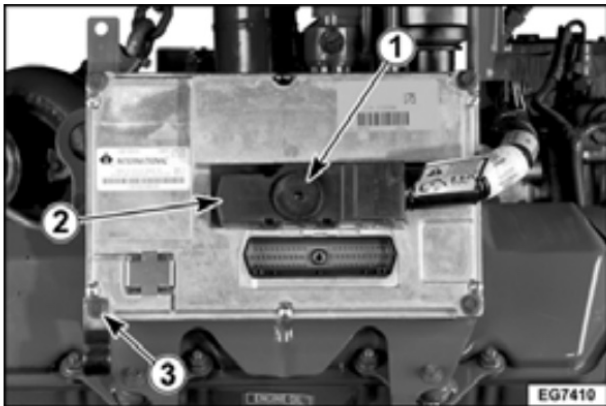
ECM Wiring Harnesses and Mounting Bolts
